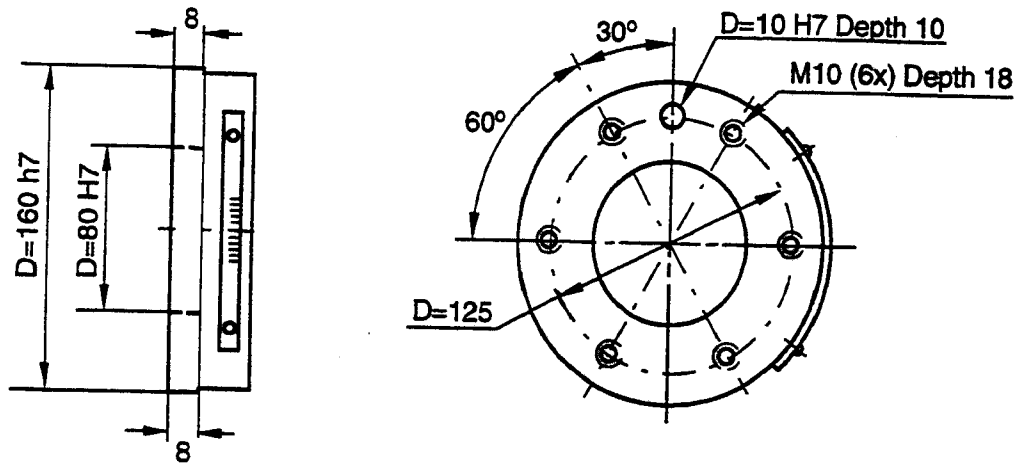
The mechanical interface (mounting flange) ISO 9409.
